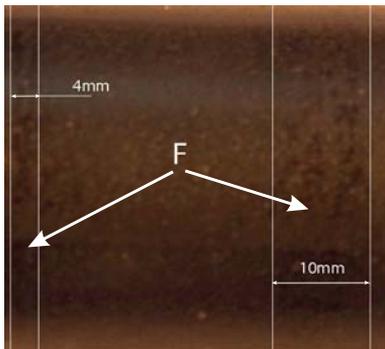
The surface of a shaft with a CrN+a-C:H:W coating after wear tests
